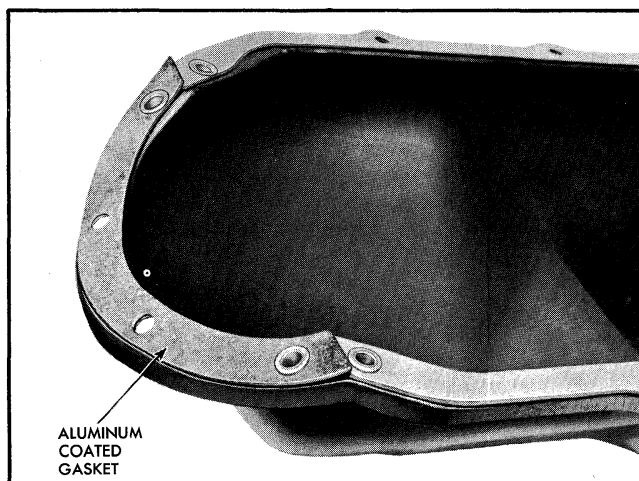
Front Oil Pan Gasket Overlapping Side Gaskets
